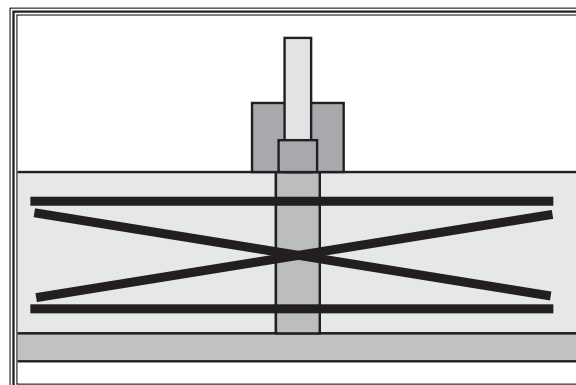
Straightedge positions for checking infeed/outfeed parallelism.
